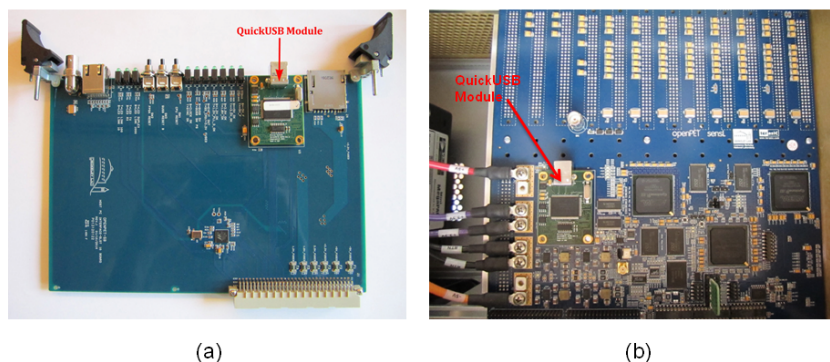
QuickUSB module mounted onto the (a) Host PC Interface Board or (b) Support Board.
